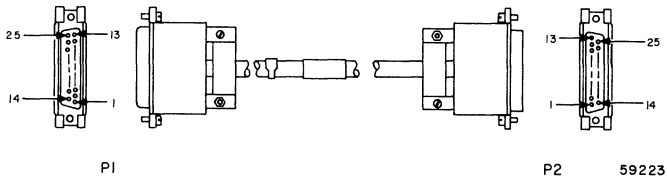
Terminal to Modem Cable Assembly 2822139
